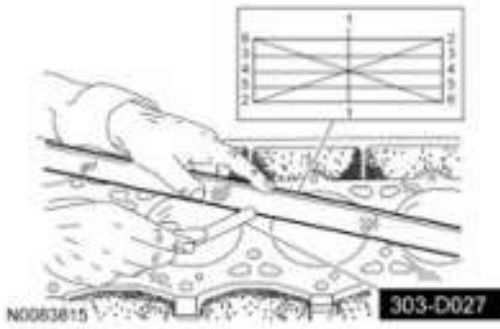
Inspecting Cylinder Block For Flatness
